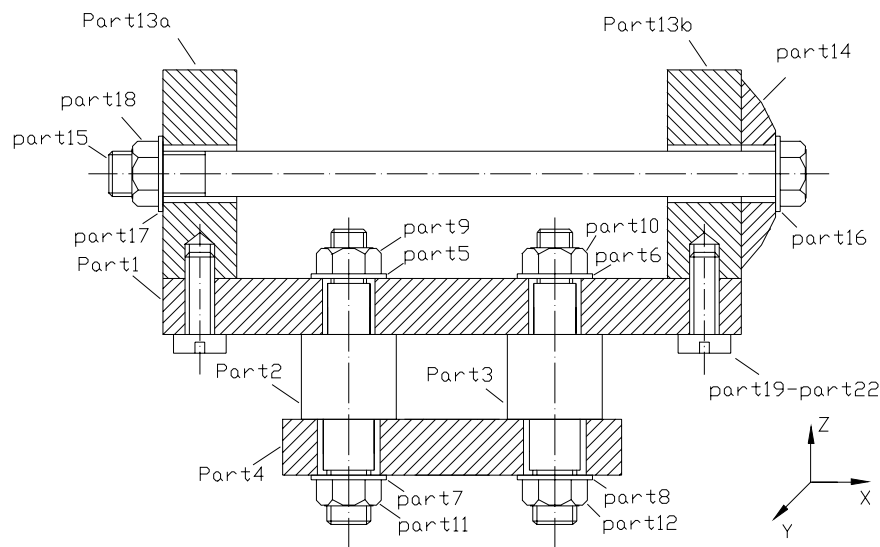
Redesigned Part 13a and Part 13b in assembly
